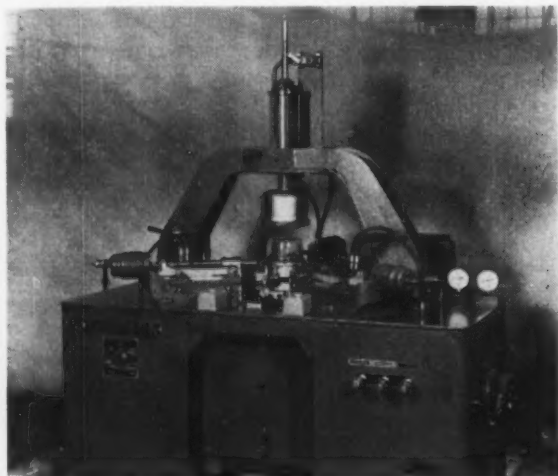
A special table type projection welder is used to mount a metal sealing ring on a glass meter bowl. Three air-operated electrodes bear radially on the work and each electrode is connected to a separate 30 kva transformer with a central fixture as a common terminal. Photo courtesy Thomson Electric Welder Co.
